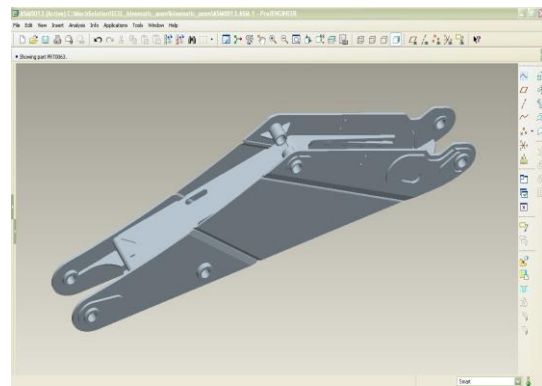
Drawing for the Boom where the dimensions of all the kinematic points are maintained to the point measured from the Machine
